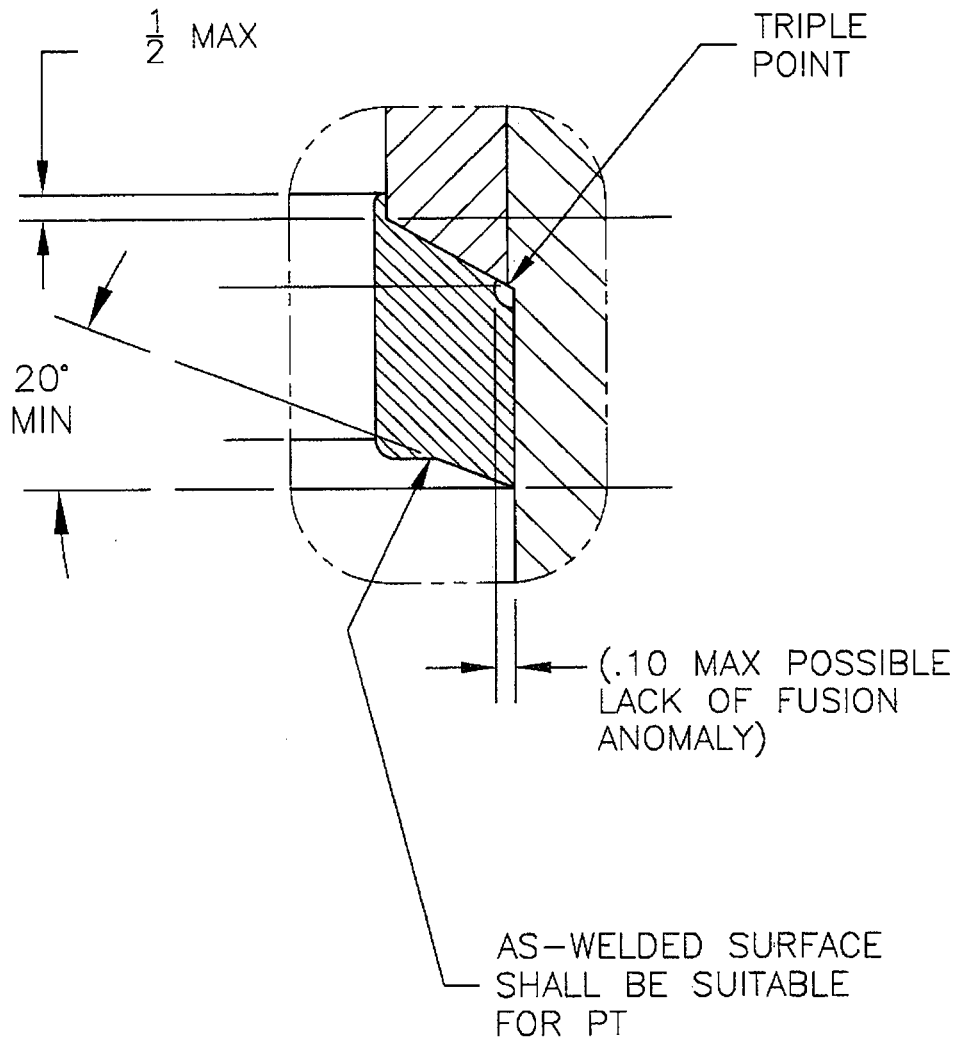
Weld Anomaly in Temper Bead Weld Repair
